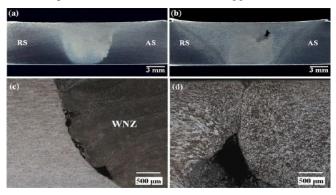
Welding defects in the joint welded at different welding parameters, a. Rotational speed 1000rpm at 30mm/min, b. Rotational speed of 1200 rpm at 30mm/min, c, d Enlarged view of welding defects
